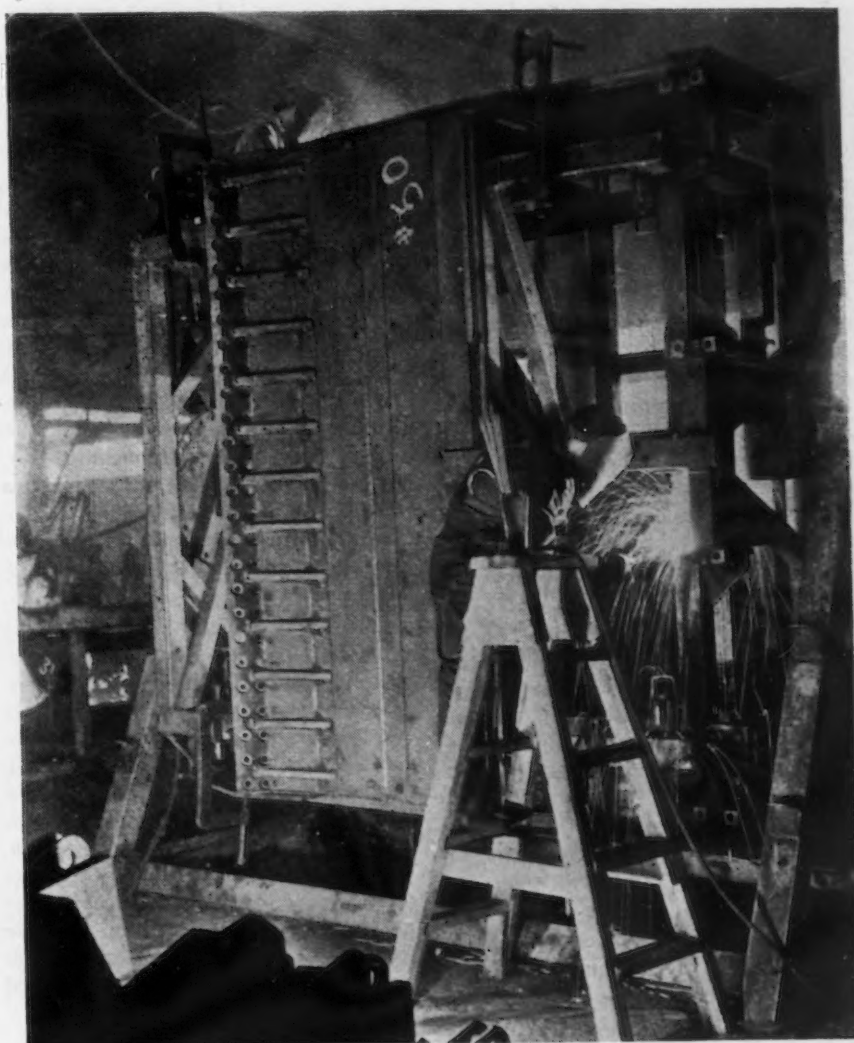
The relationships between the pre-machined and therefore important functional parts of this large earthmoving scraper body must be maintained accurately and positively. The pre-machined surfaces of the parts fit accurately against correctly placed stops on the setup fixture and assure proper alignment without machining the whole structure.
